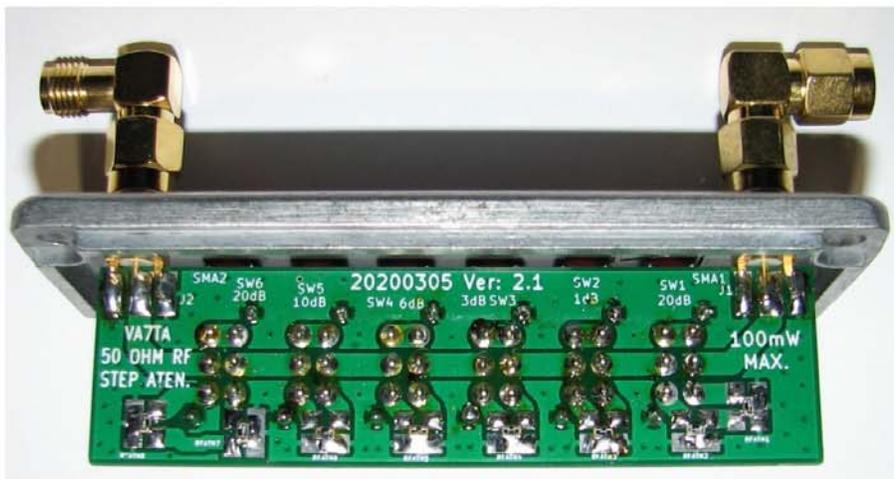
Step attenuator PC board, attenuator SMD side up view.
